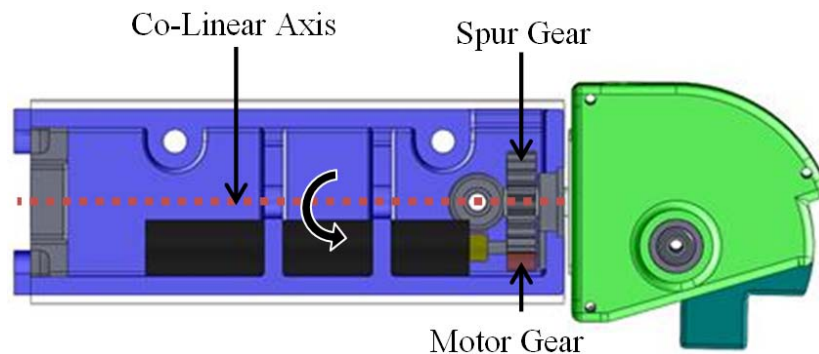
SILS Magnet Camera motor mounting and operation.
